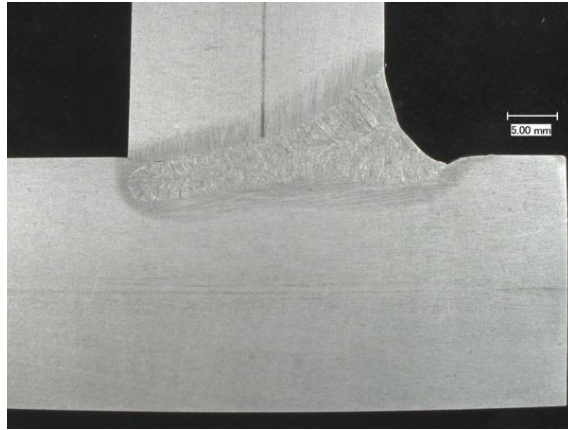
Plate thickness 25 mm; beam power 50 kW; welding travel speed 0.6 m/min
